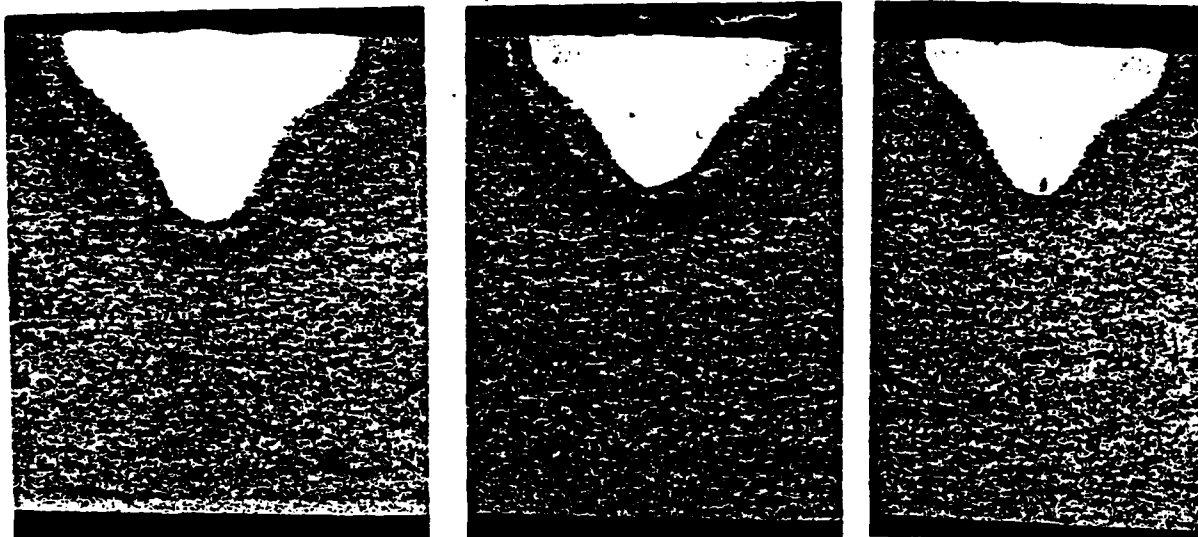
Macrosections of aluminum bead on plate laser welds showing the effect of speed on weld heat input. Mag. 6X.
